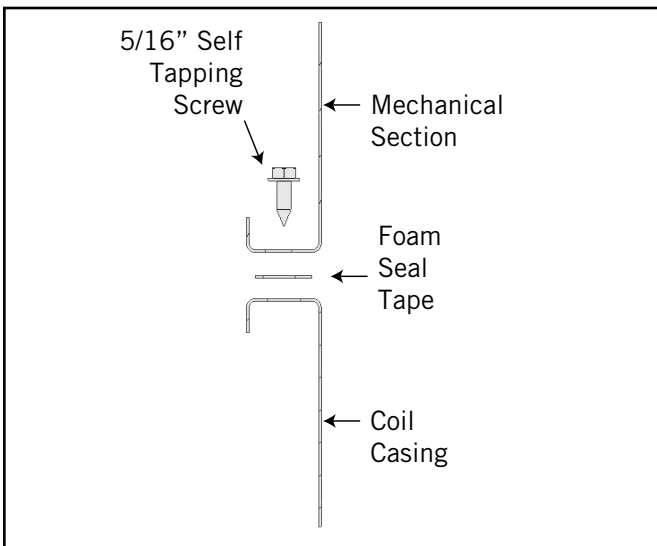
Mechanical/Coil Casing Assembly for Optional Three-Piece Rigging
